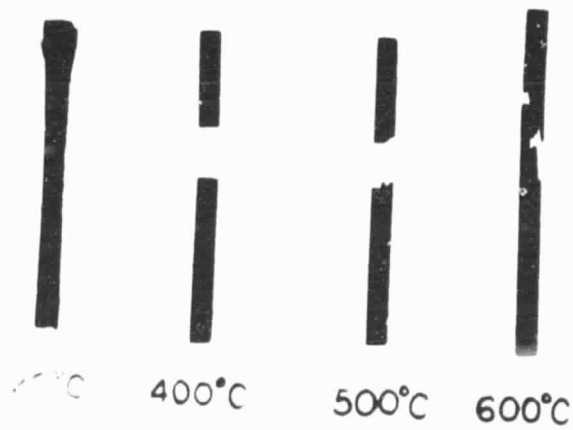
TYPICAL BROKEN SPECIMENS FROM NEW TENSILE TEST METHOD
